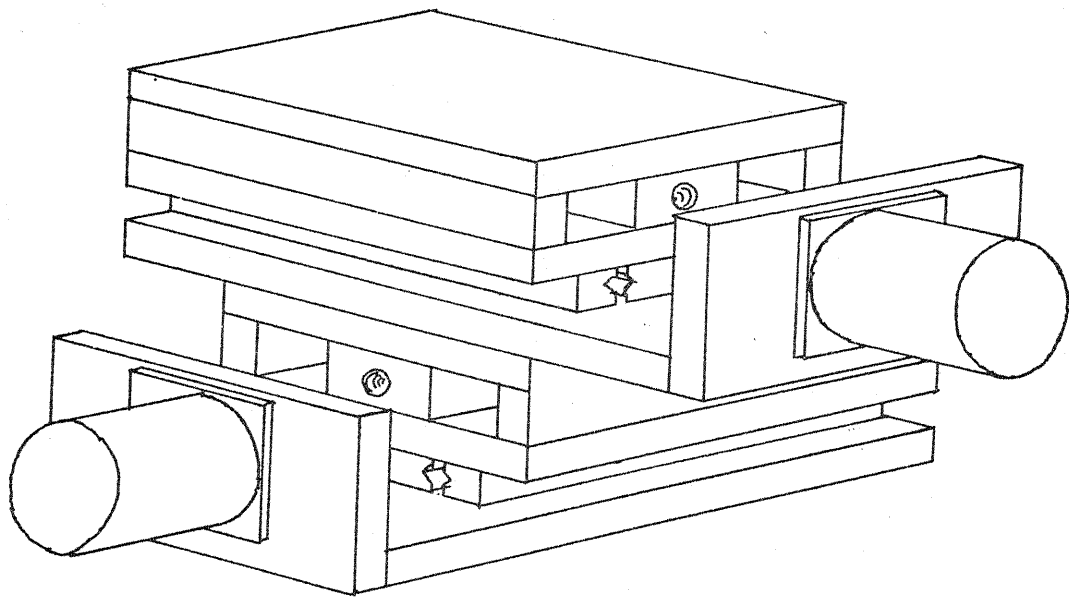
DRAWING OF PROPOSED CO-ORDINATE UNIT
